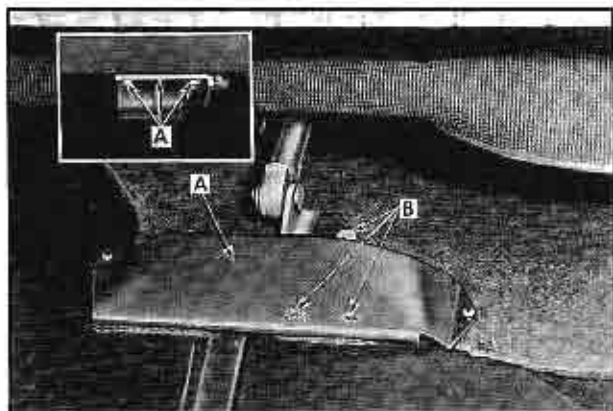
Horizontal Electric Regulator Removal (Sedans)
